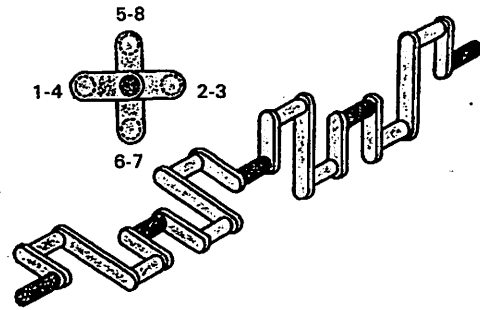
D. A straight eight crankshaft of 4-4 type resembles two four cylinder crankshafts connected end to end.
